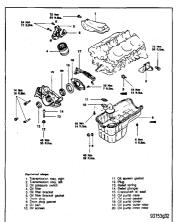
Exploded view of the oil pump mounting—3.0L engines
